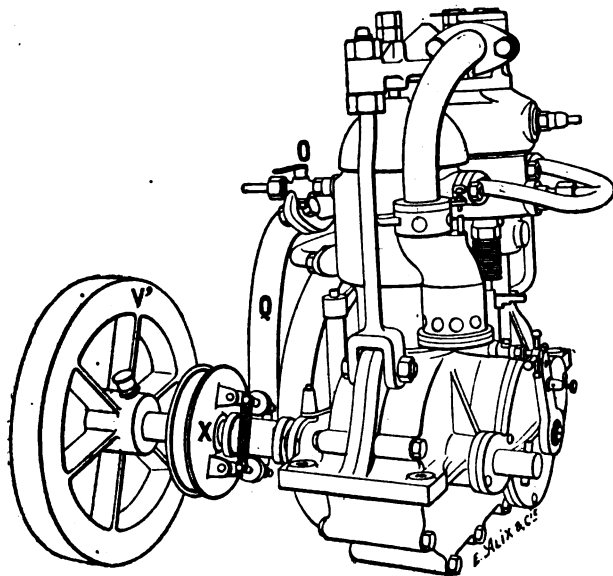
VIEW OF MOTOR, SHOWING GOVERNOR.
